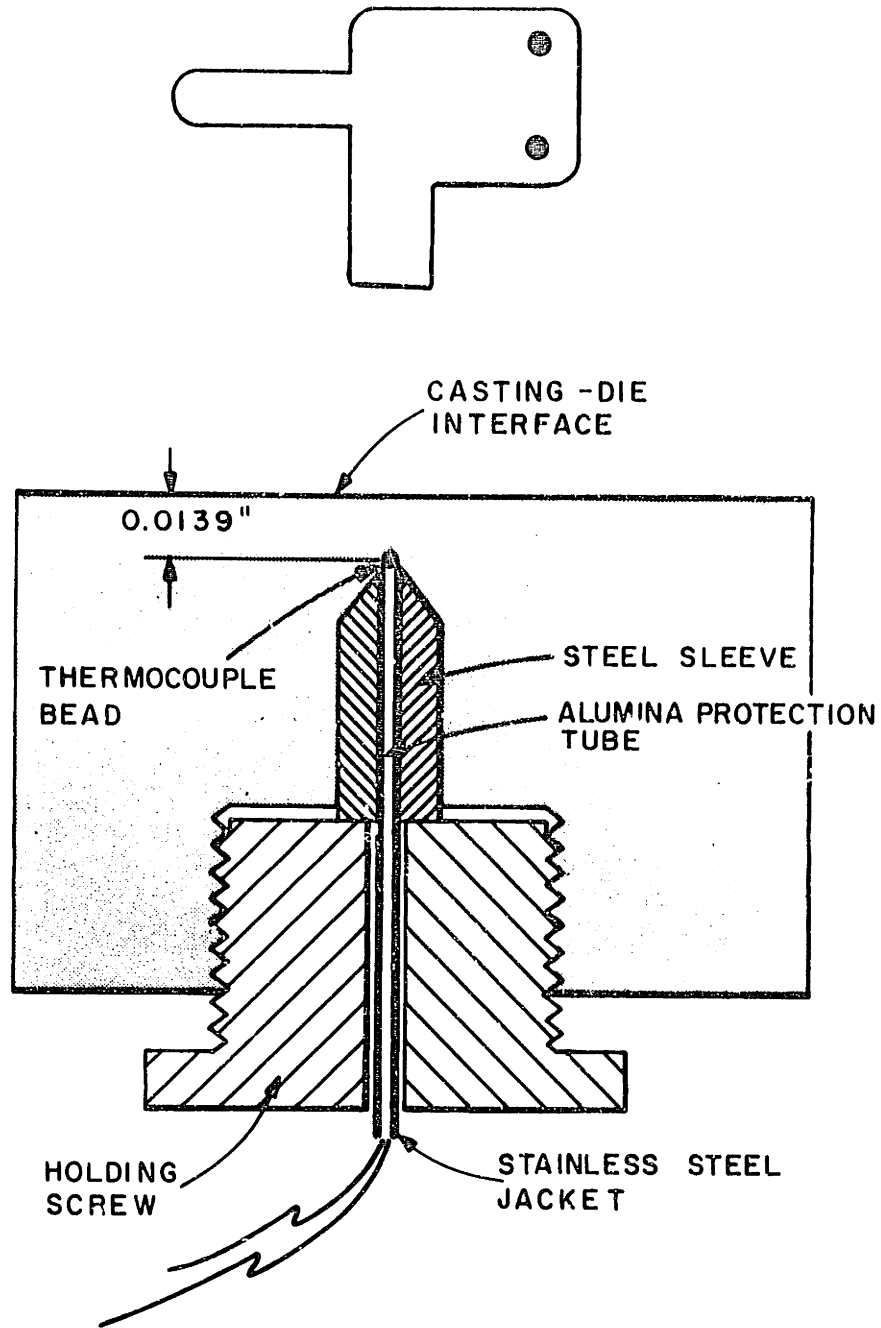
Schematic of thermocouple assembly in the low pressure die casting machine. Figure on top shows position of the thermocouple in the die cavity.
